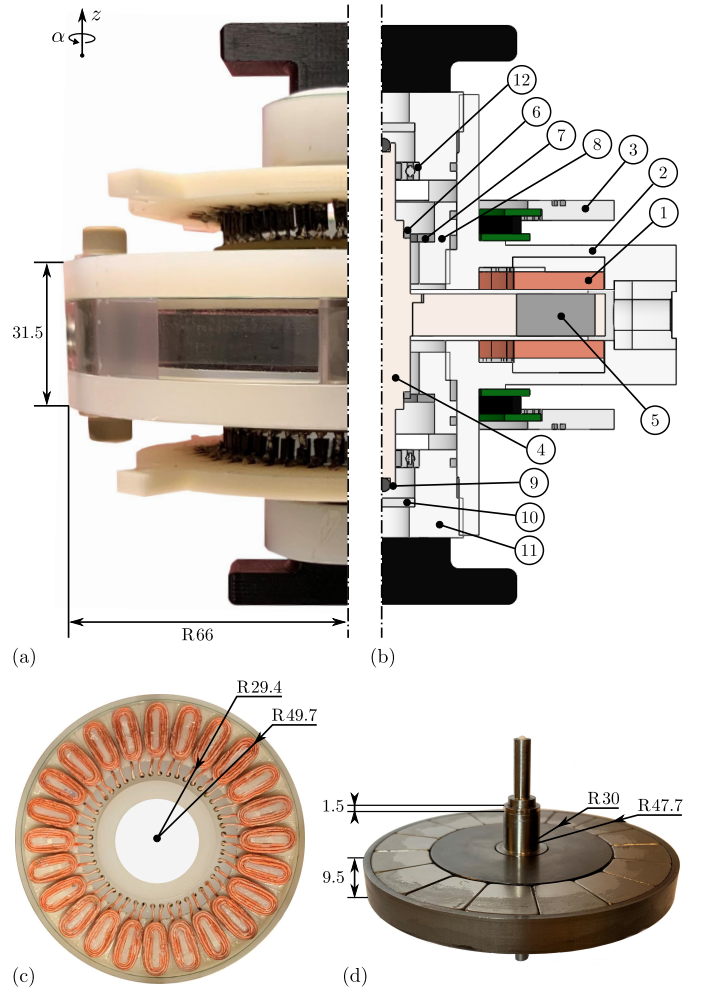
Fully passively levitated machine prototype. (a) Picture. (b) Cross-sectional view. (c) Armature winding. (d) Rotor.
